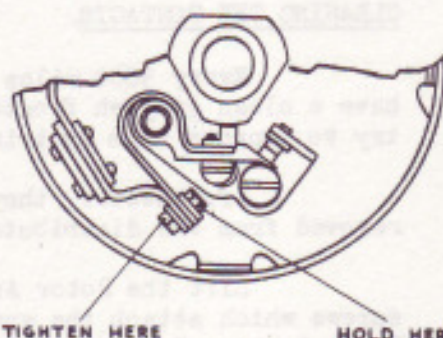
TO AVOID TWISTING BREAKER ARM SPRINGS WHEN TIGHTENING NUTS.
